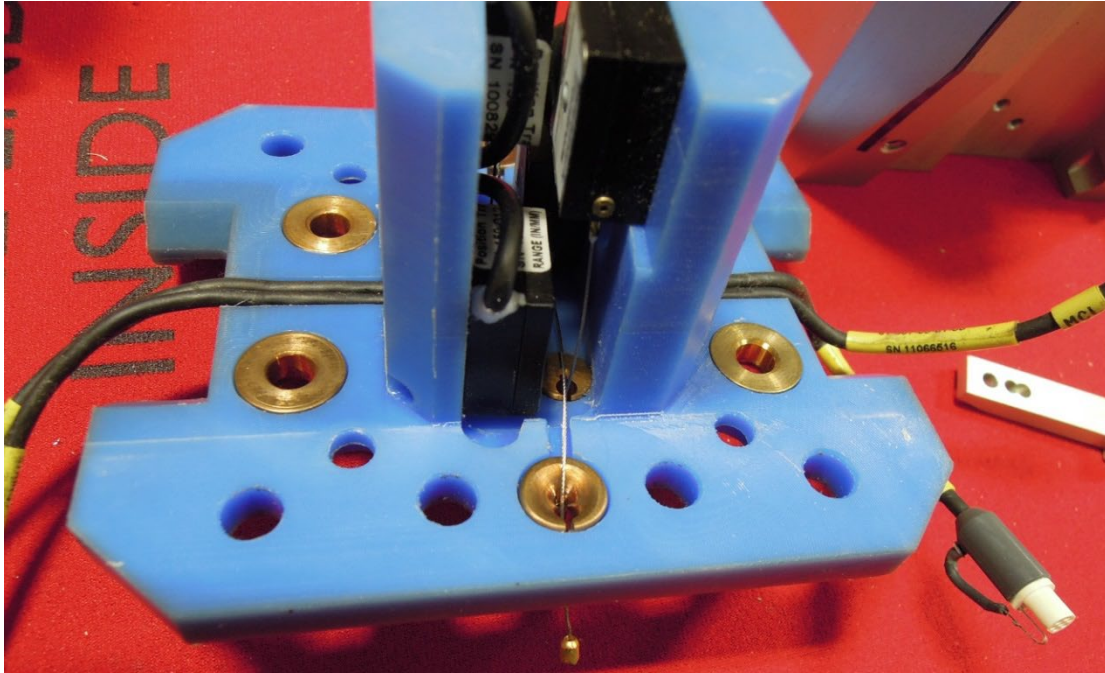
Installation of the string potentiometers onto the meniscus assembly
